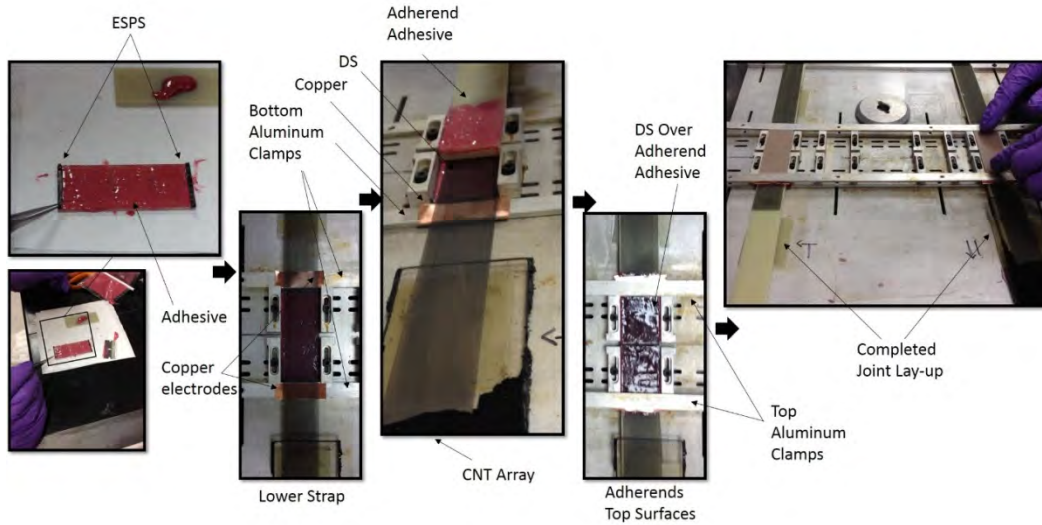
Step-by-step DSJ lay-up process, with CNT DS and edge SPS incorporated, using an aluminum jig.
